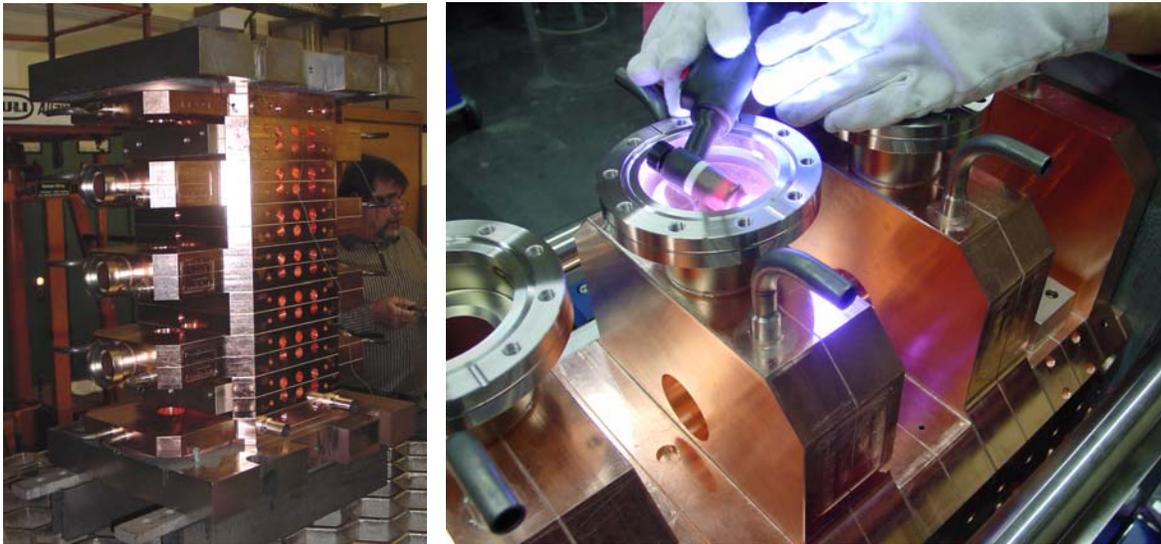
First CCL segment following stack braze and during welding of flanges.
